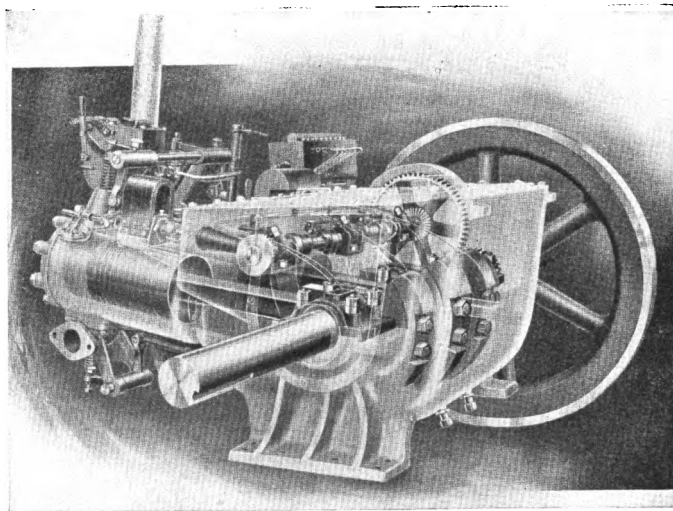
Valve Operating Mechanism of Oil Turn Motor.
